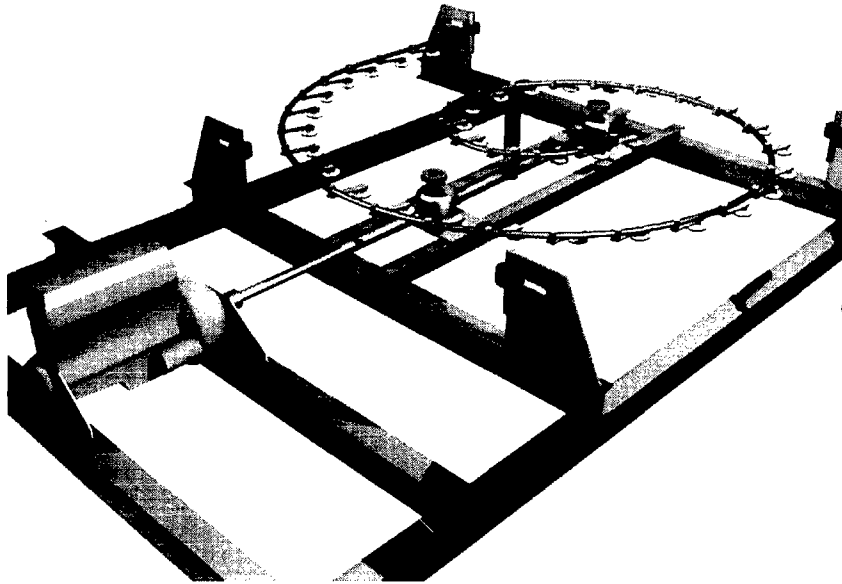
The same system as Figure 6 but with the Drive Plate removed to show the Motor Shaft passing through two Gear Boxes with their Vertical Camshafts that propel the Drive Plate.
